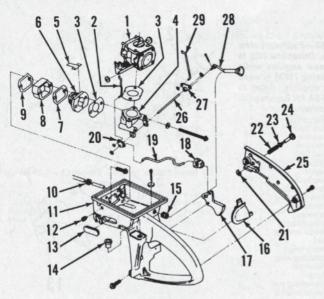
Exploded view air box assembly on Super XL engine.
